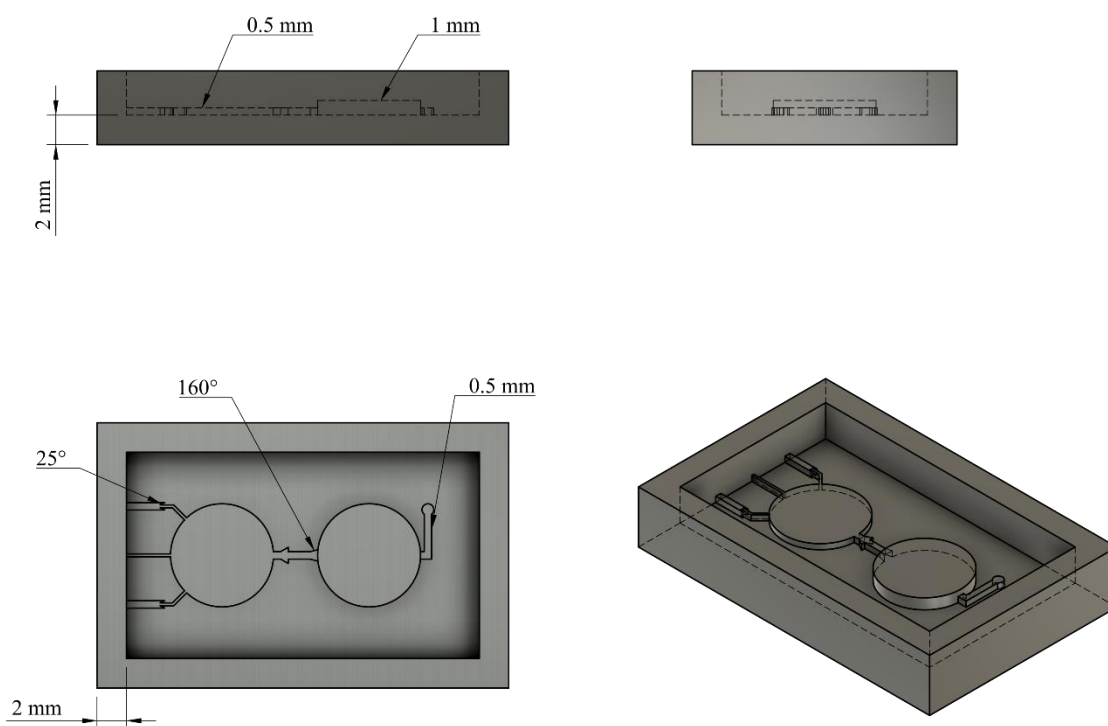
The 3D mold for making microfluidic devices. The 3D model was created using Autodesk Fusion 360 (Autodesk, Inc. CA, USA) and later manufactured by a form2 3D printer.
